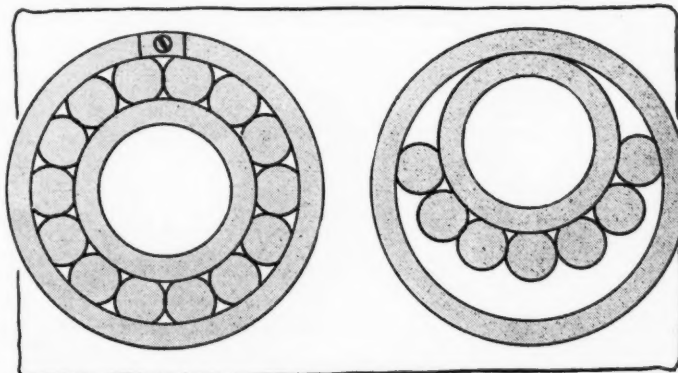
Two types of annular ball bearings to show method of assembly. At the left is a full race and in order to insert the balls a part of the outer race is removable. If the races are made solid, then fewer balls must be used so that they can be inserted by placing them eccentrically, as at the right
